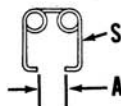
Pressure plate return spring (S) end gap (A) should be 17.0-17.5 mm.
